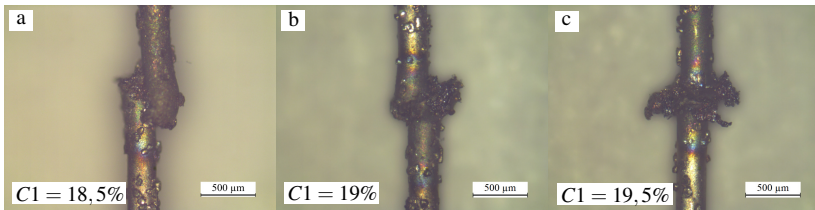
Welds performed with parameters a) PT4, b) PT5 and c) PT6 (Table 11).
